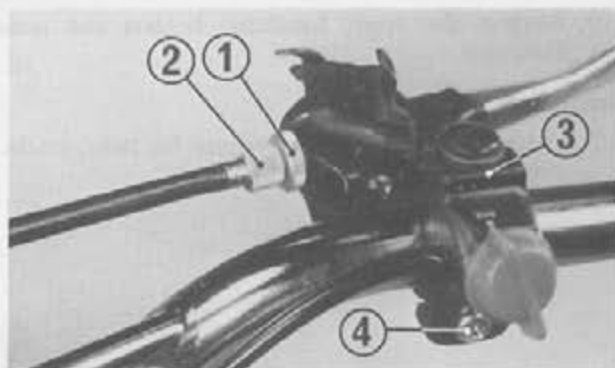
(1) Lock nut (2) Adjuster nut (3) Handlebar bracket (4) Screw
